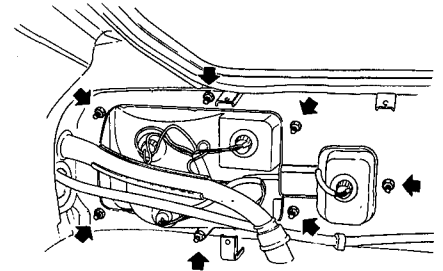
Removing nuts attaching rear combination lamp to body
